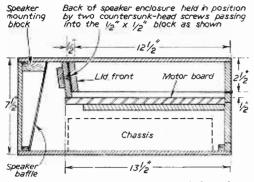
Longitudinal cross-section of the cabinet showing full details of the construction.
